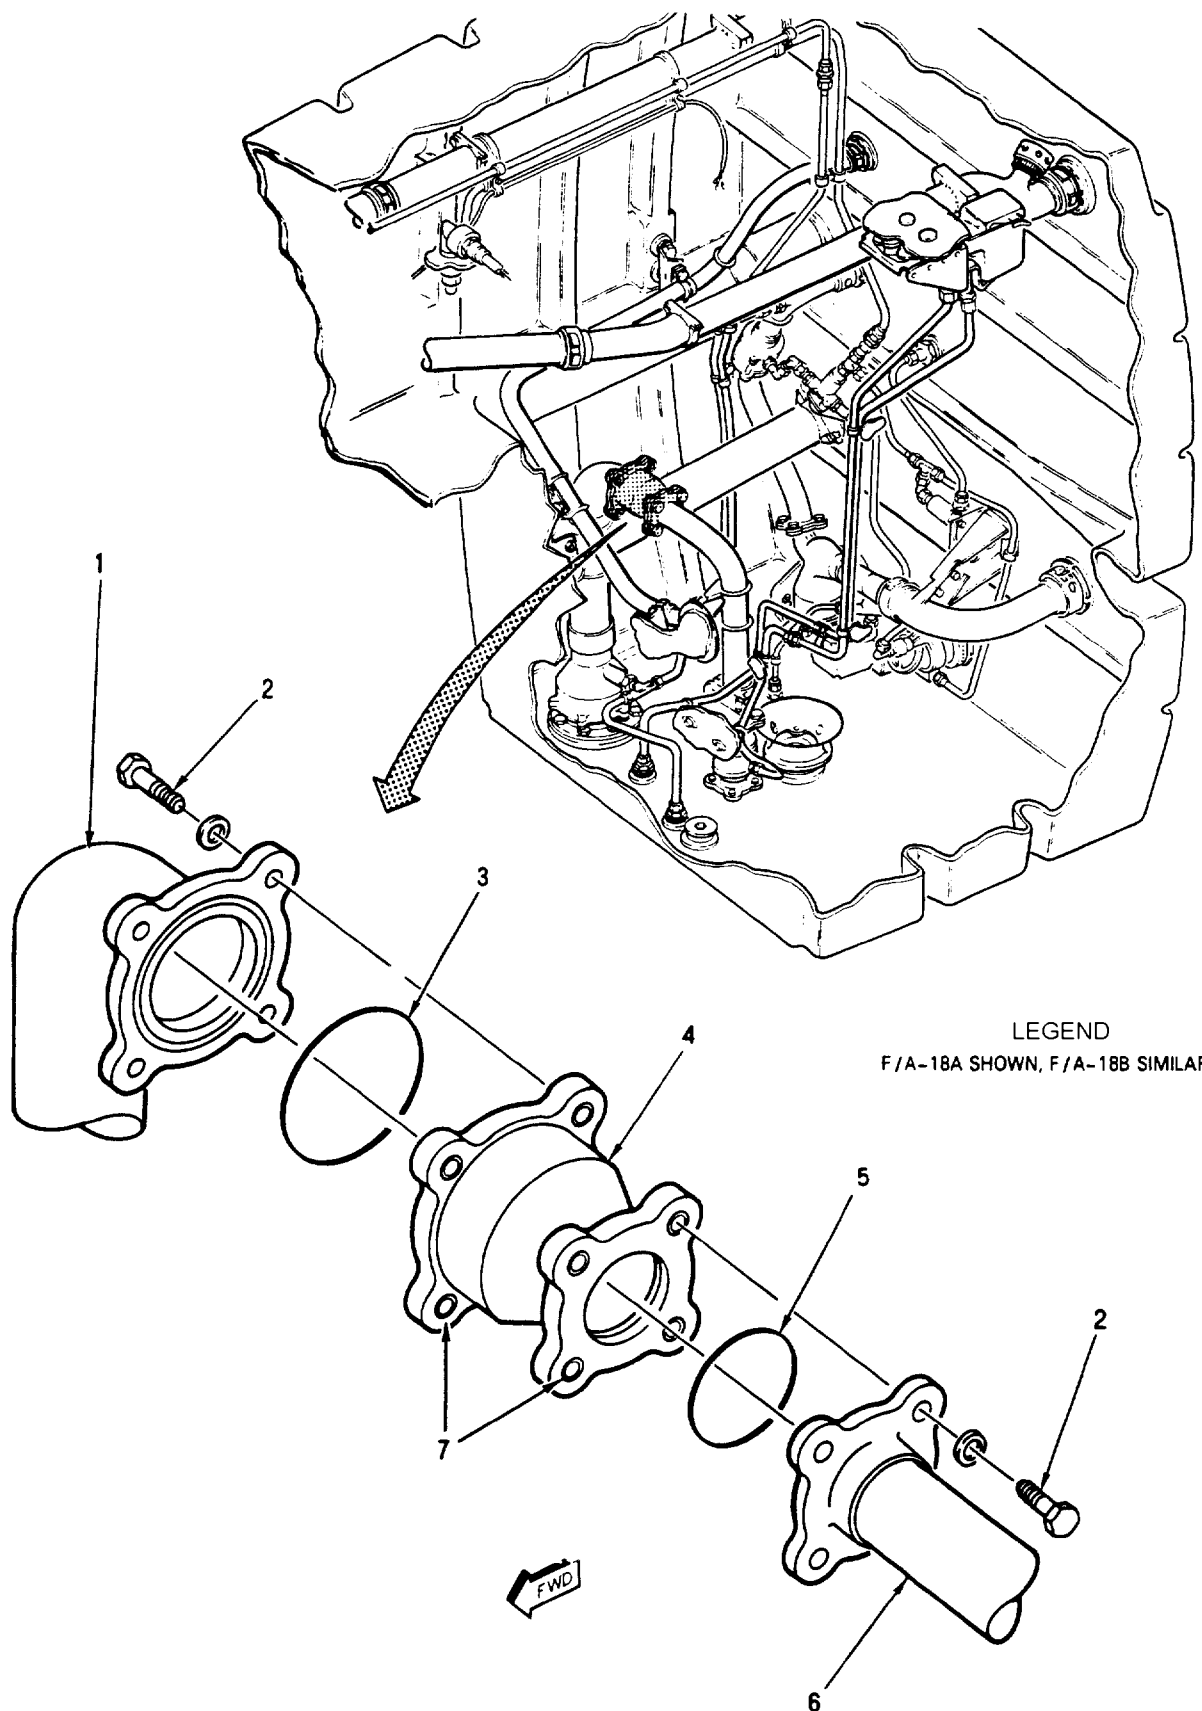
No. 1 Fuel Tank Refuel/Transfer Check Valve (5VAP532) (Sheet 1)
